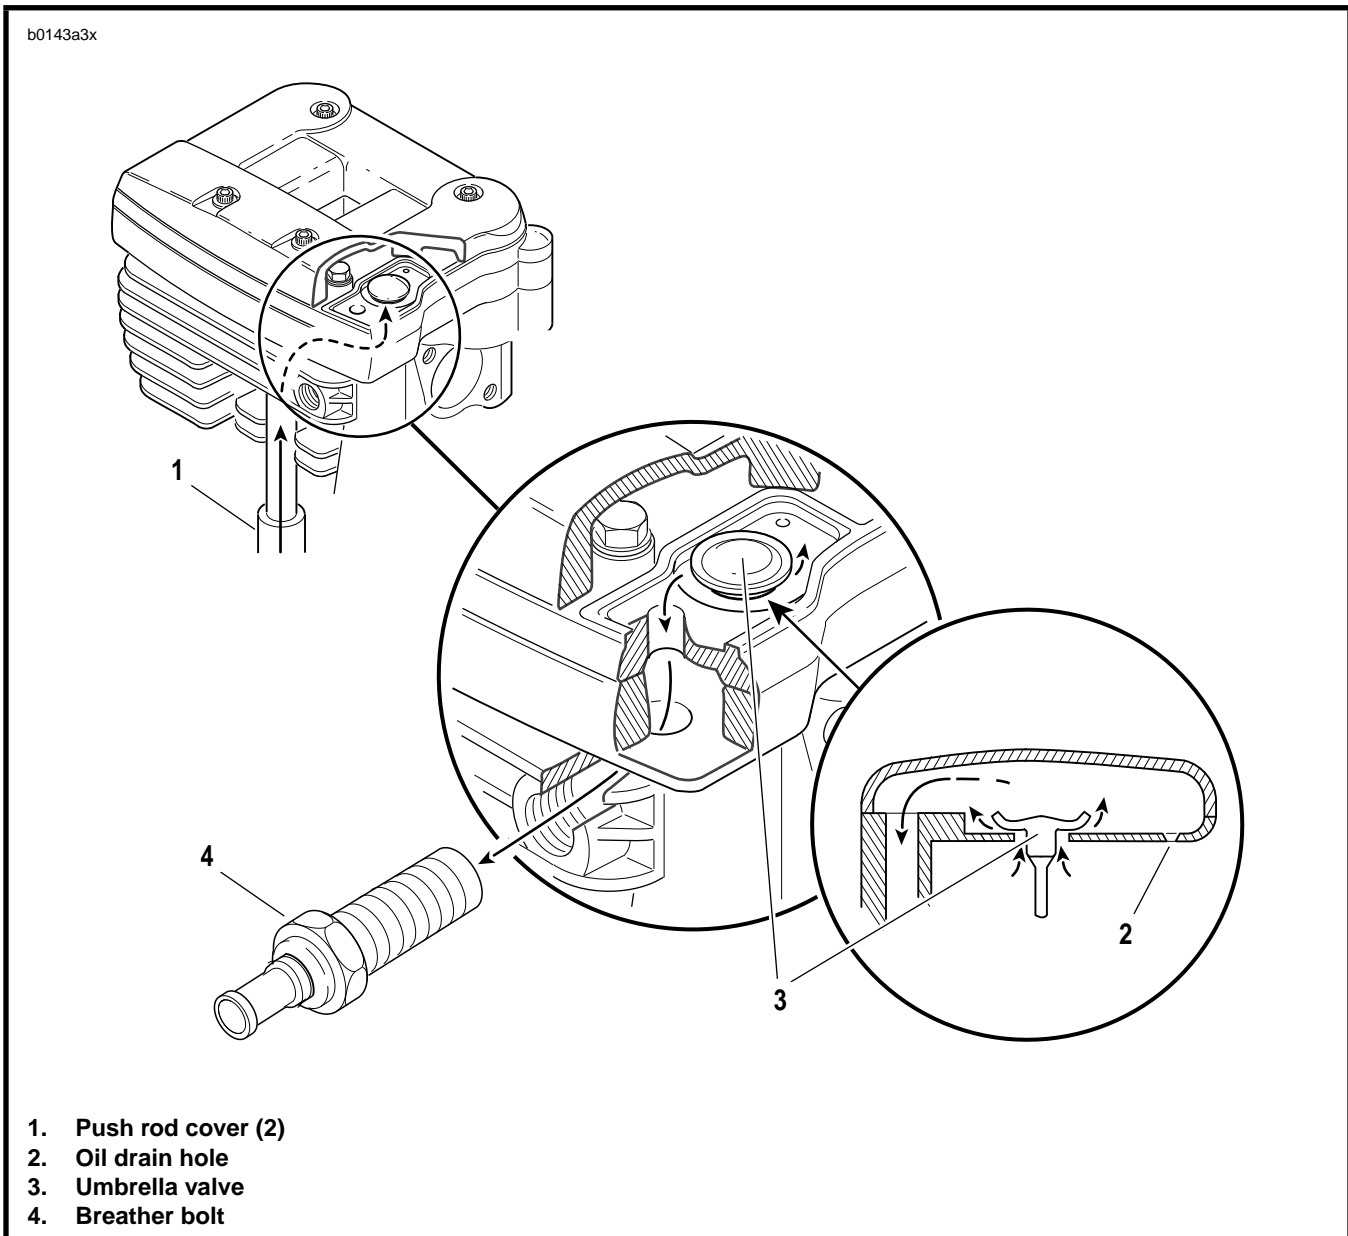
Crankcase Breathing System – Typical Cylinder
